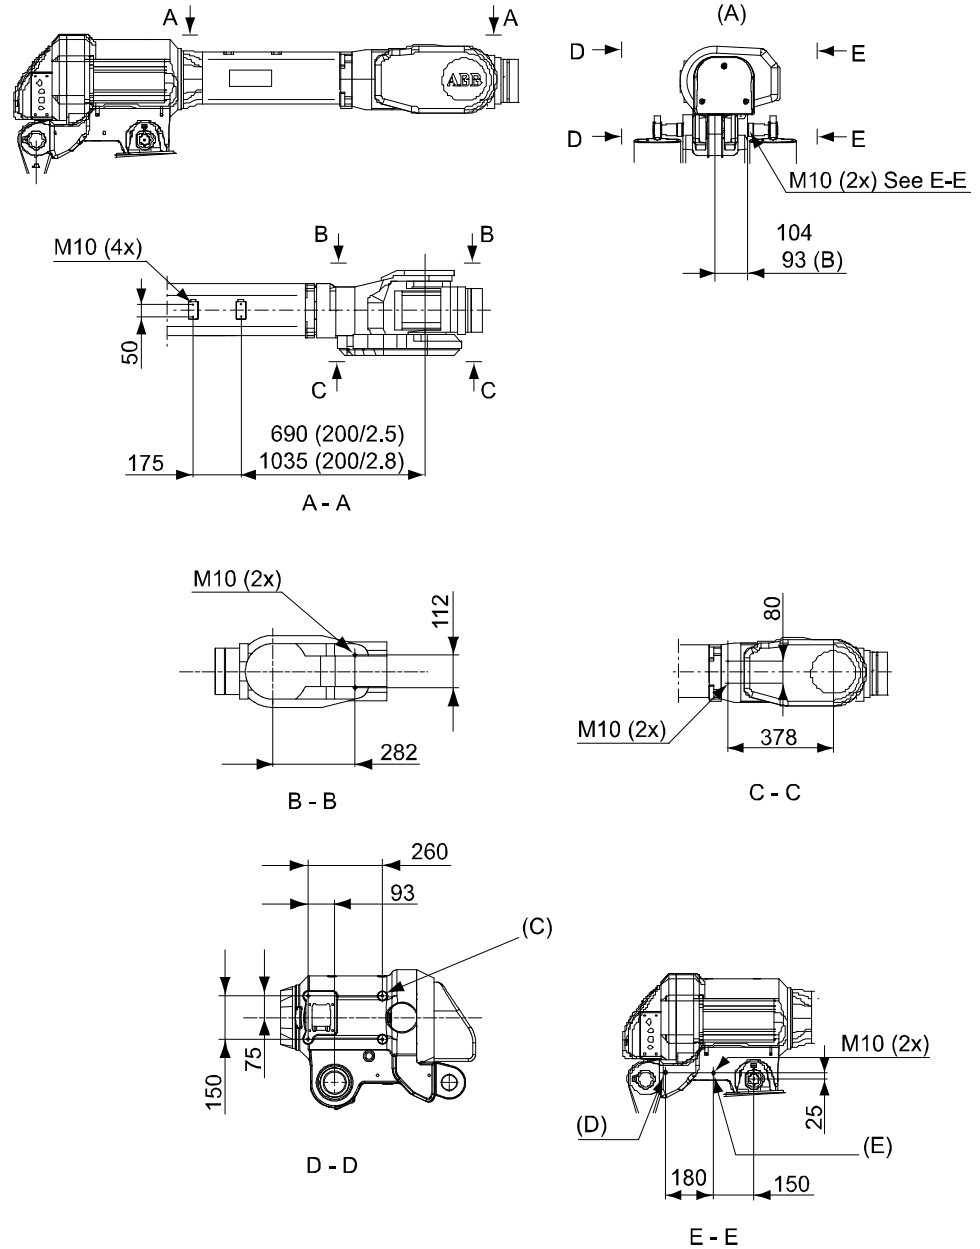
Holes for mounting of extra equipment on to the upper arm (dimensions in mm).
